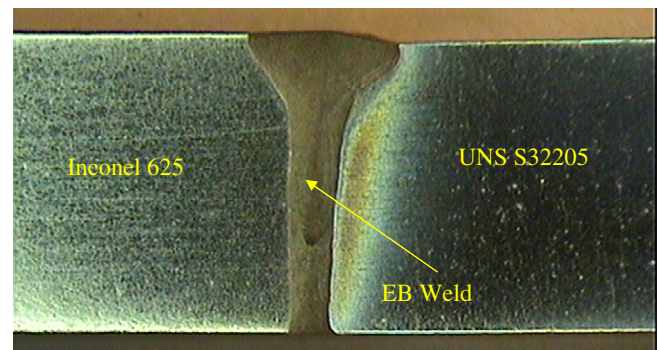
Cross-section macro-graph of EB welded Inconel 625 and UNS S32205.
